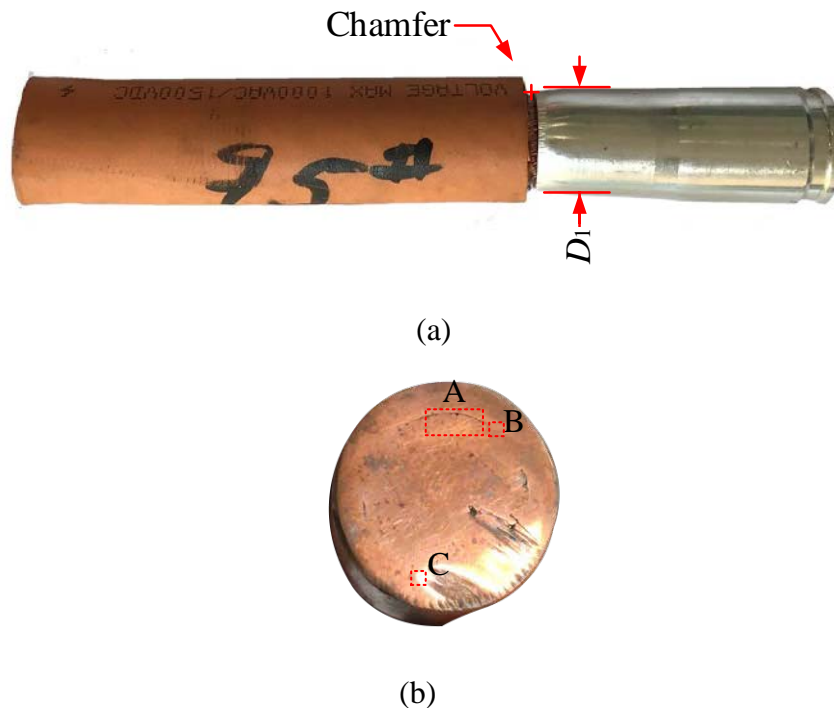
(a) Crimped sample of Cu HV wire harness and Cu terminal, and (b) Cross-section of crimped sample
